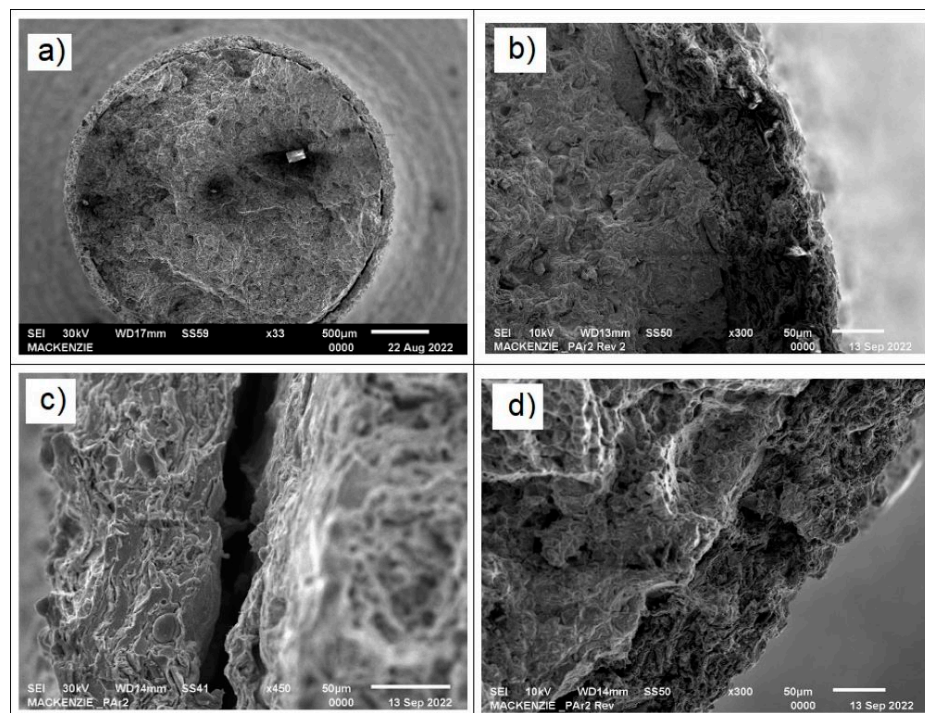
The fracture surface of the coated sample at 550 °C and 250 MPa: (a) full section, (b) enlargement of the upper right side, (c) detail of the partial coating detachment, (d) detail of the full adhered coating.
